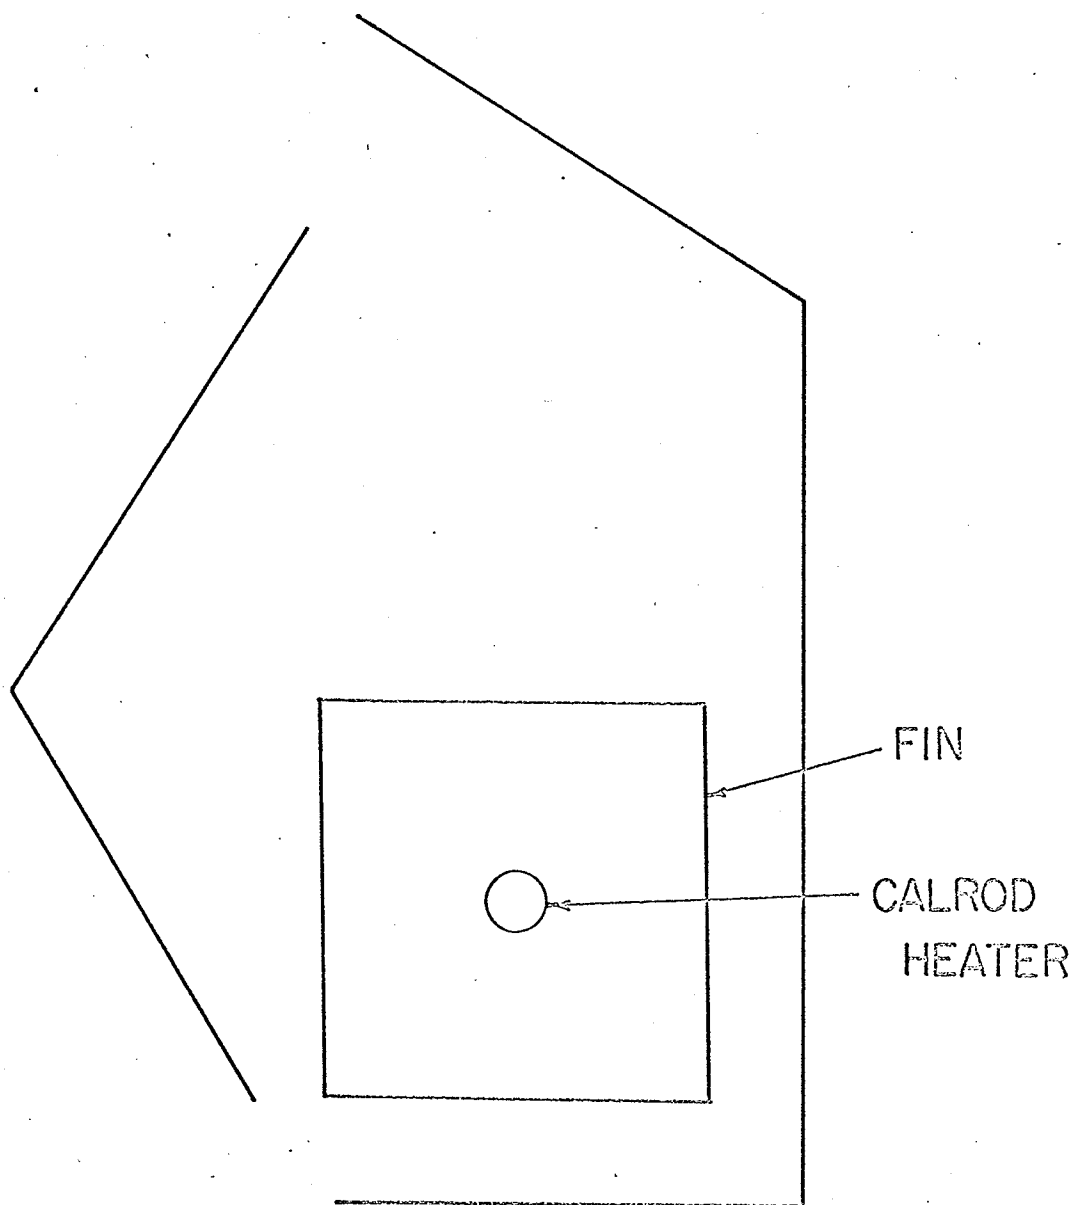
HEATER ENCLOSURE NO. 3 (FULL SIZE)
